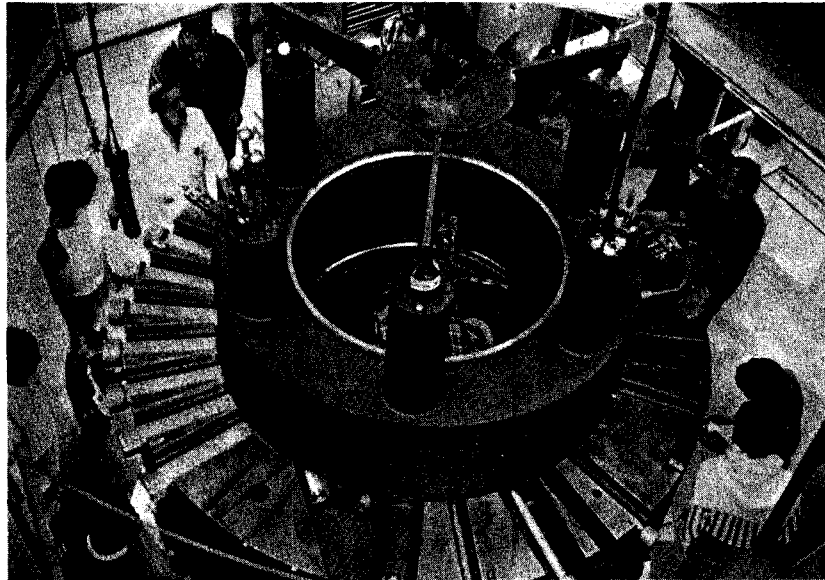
Coil assembly in final position on lower half of magnet. Electrostatic extraction penetrations are at lower right, magnetic channel pipes are at left, and extracted beam tube is at bottom.
